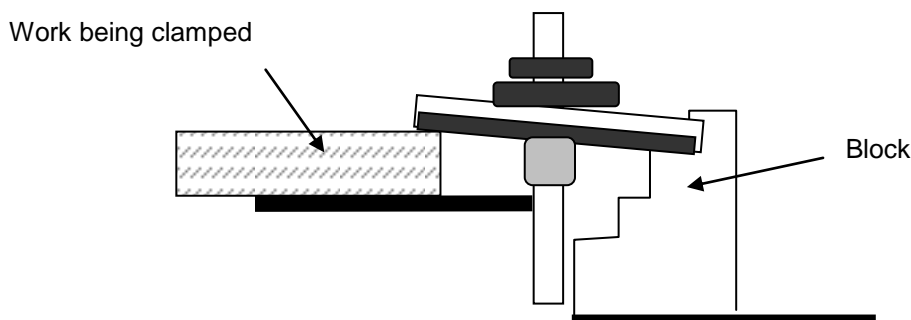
B: Incorrect Clamping Procedure. Block is lower than piece being clamped
